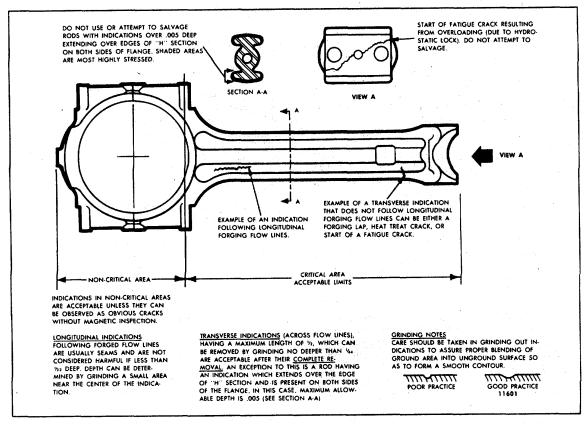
Magnetic Particle Inspection Limits for Connecting Rod.
